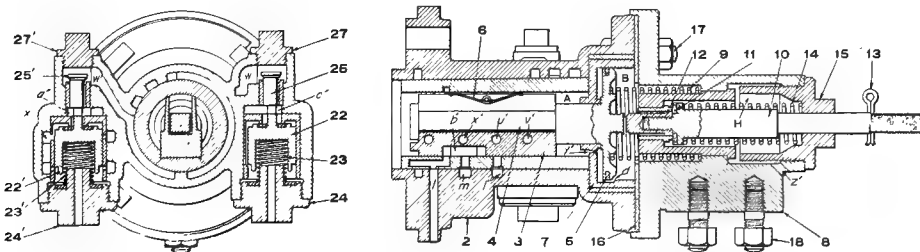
Actual Assembly, H-3 Change-Over Valve for Empty and Load Freight Brake Equipment.
